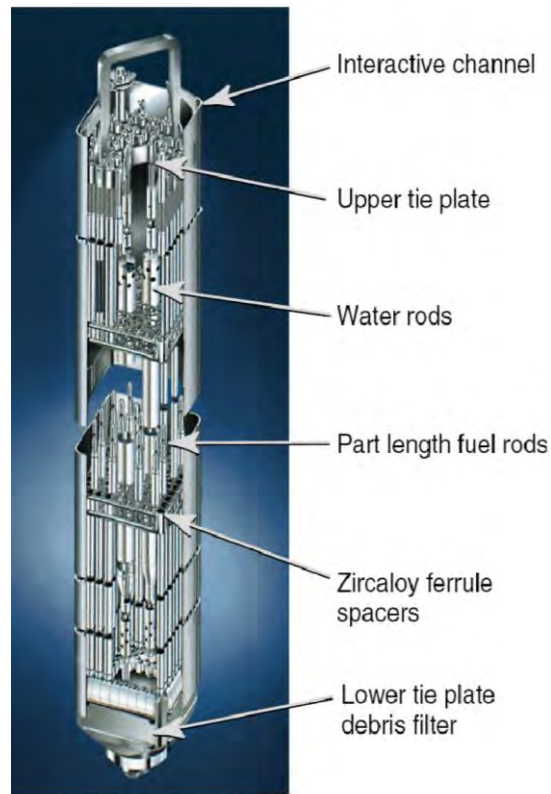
Side View of GE14 Fuel Assembly (U.S. Nuclear Regulatory Commission, 2011)
